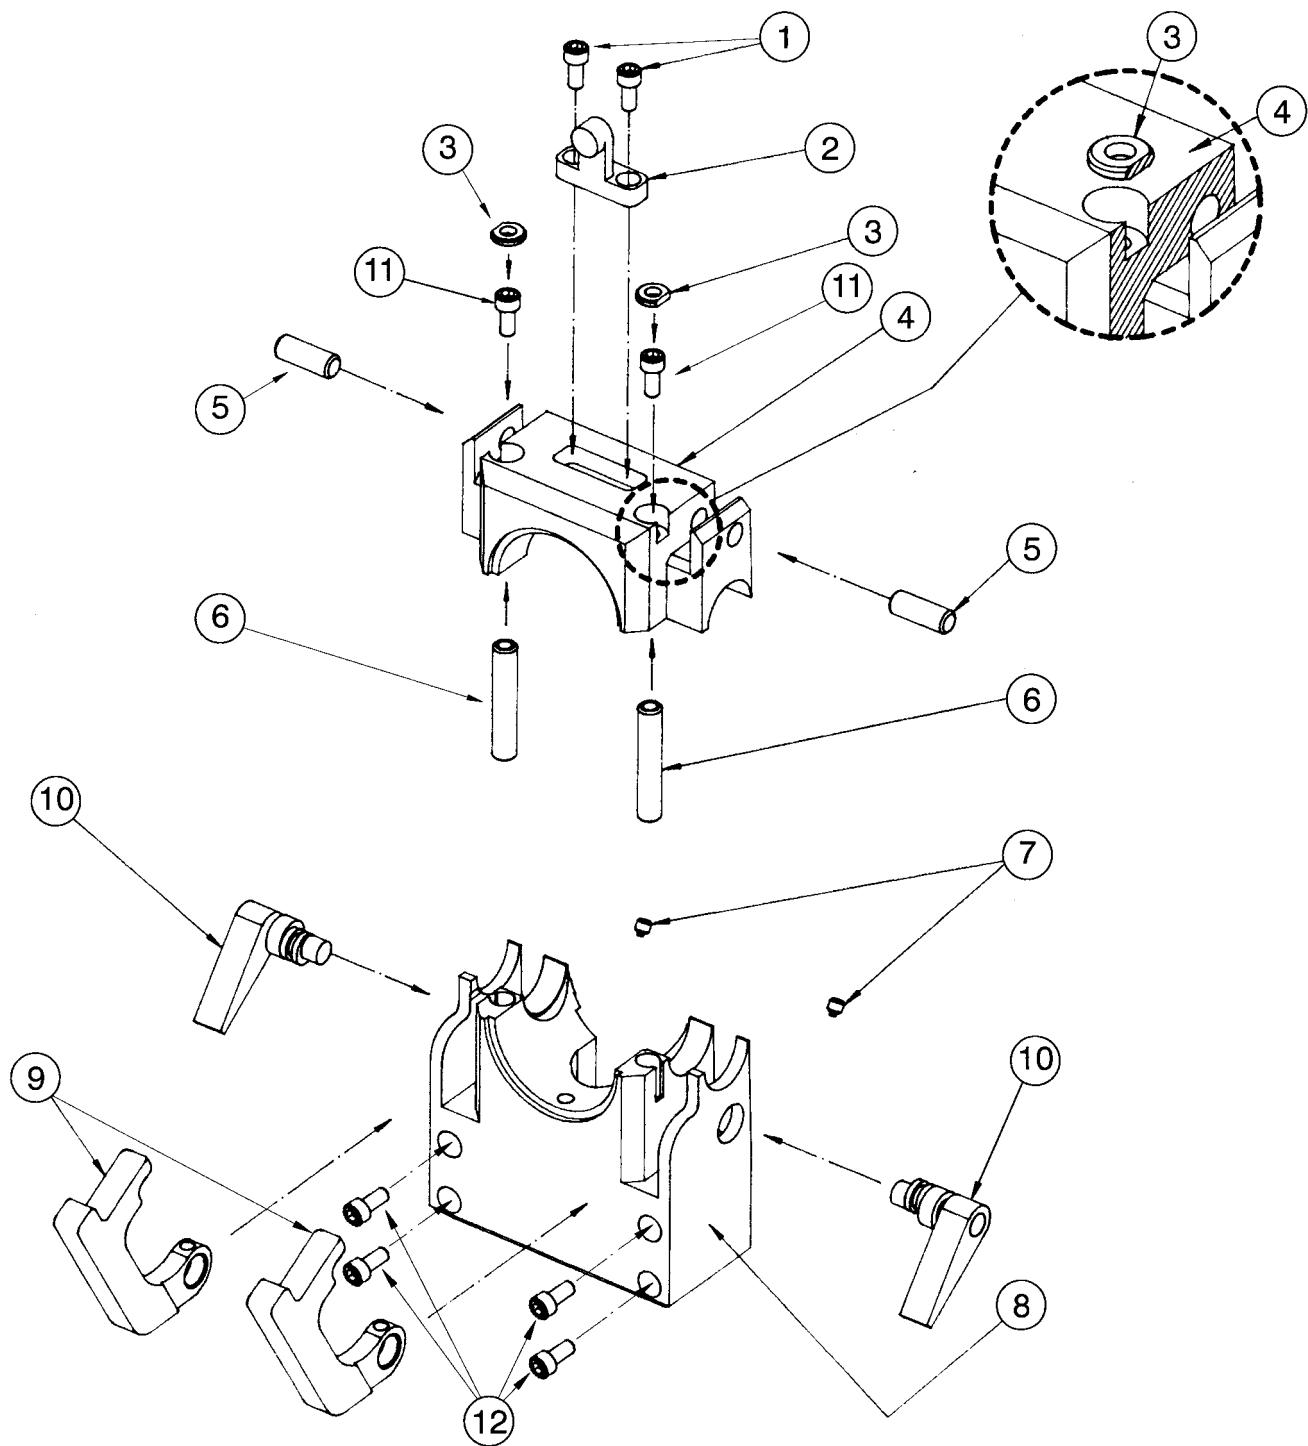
CWS-5FSP2 Special Purpose Fixture Block
